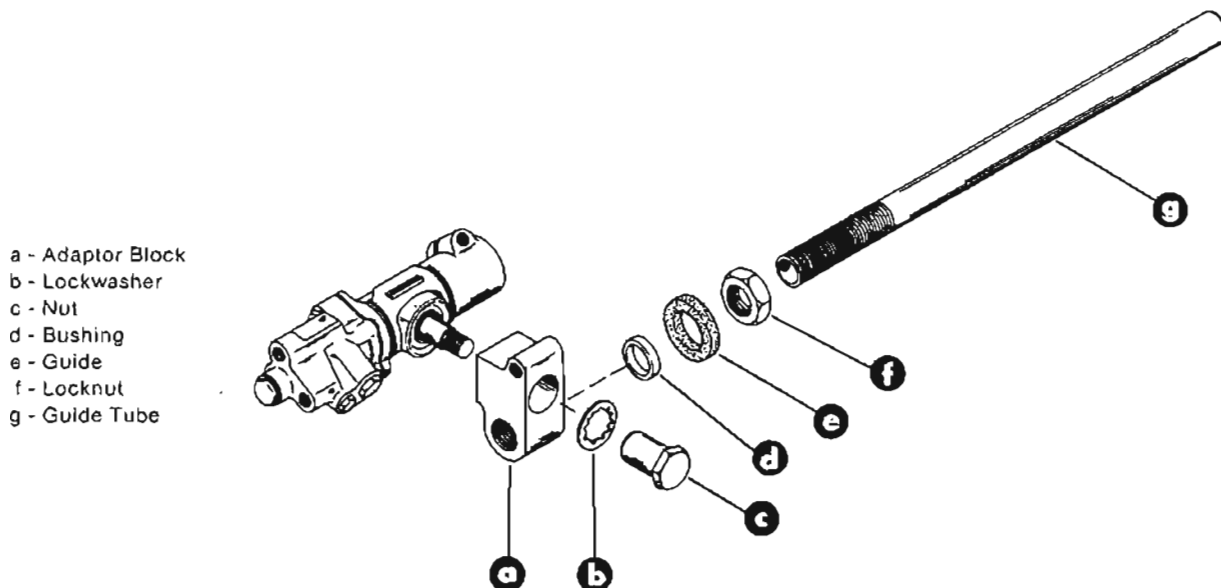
Removing Cable Guide Tube and Adaptor Block Assembly
